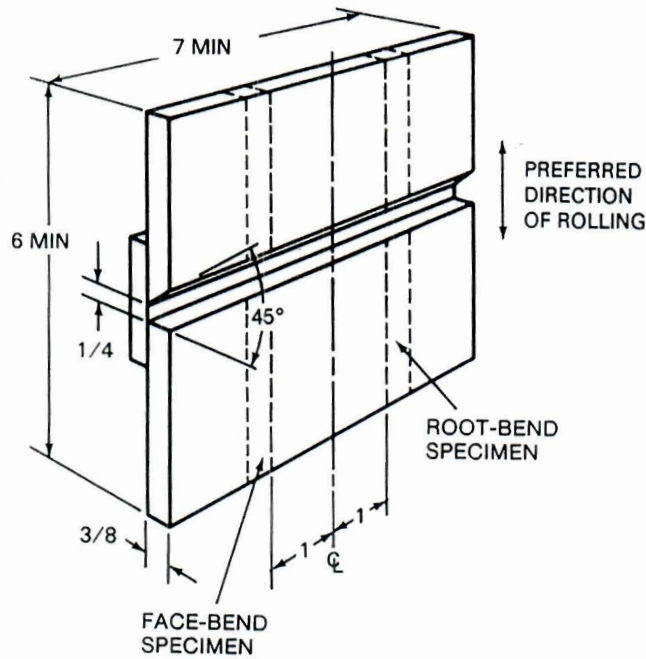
Optional Test Plate for Unlimited Thickness — Horizontal Position — Welder Qualification (see 5.23.1.2)
